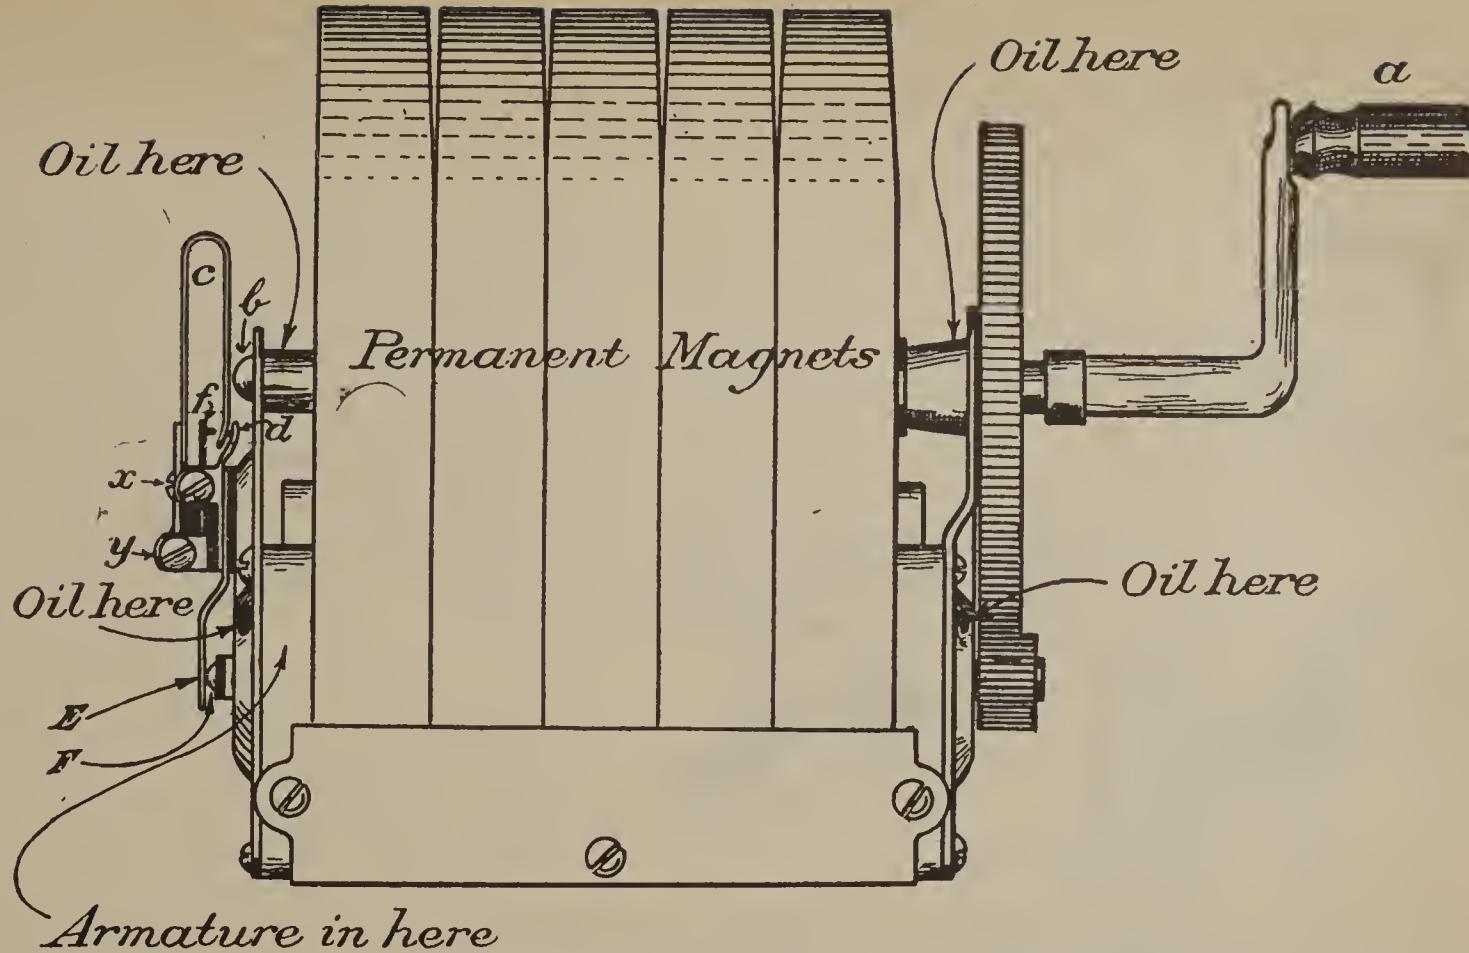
The magneto-contact assembly includes all of the springs, contacts, binding screws, and insulation material shown at the left end of the magneto in Figure 84. The entire assembly is removed by taking out the two end screws (not shown in this cut)
